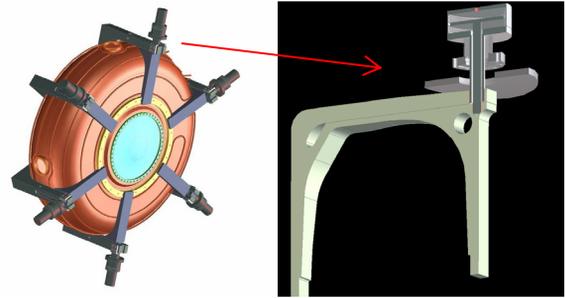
Six tuners on each cavity (left) and enlarged view of one tuner (right) showing the actuator and pivot point.
